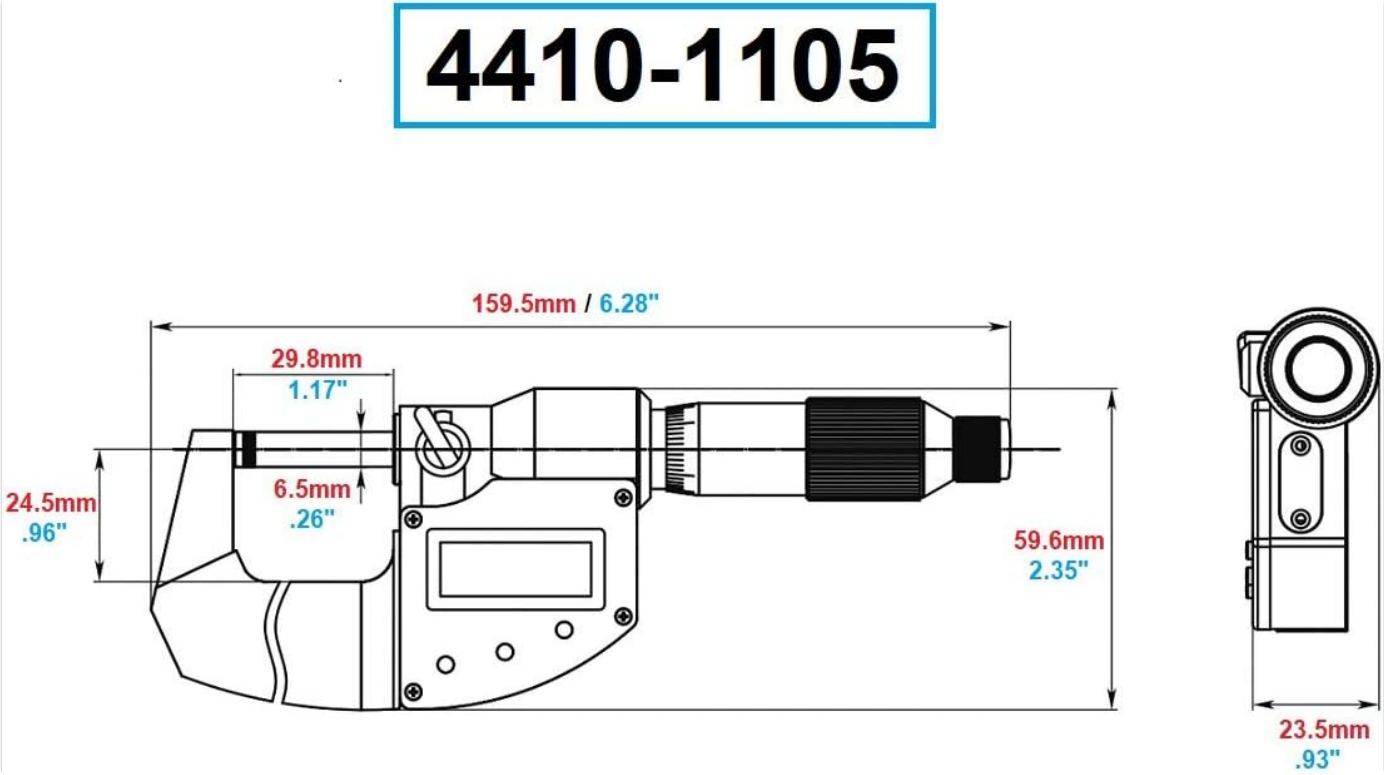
Dimensional drawing of the Dasqua Digital Micrometer, showing key measurements.
